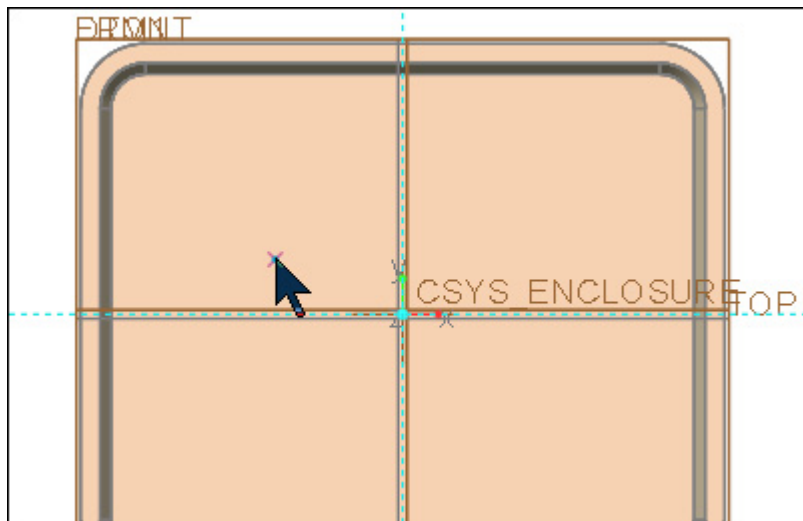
(b) Pick First Point to Determine the Starting Point of the Lettering
